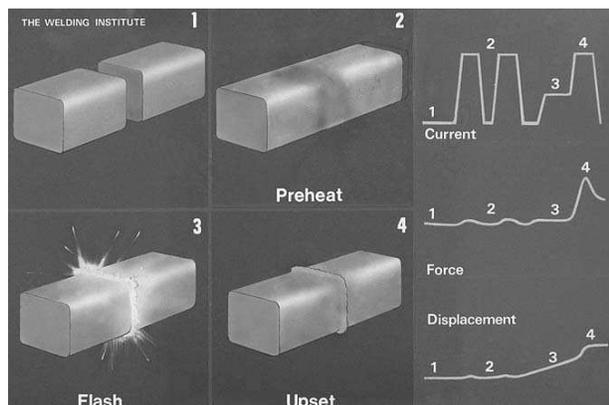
Principles of flash butt welding. Courtesy of TWI Ltd
